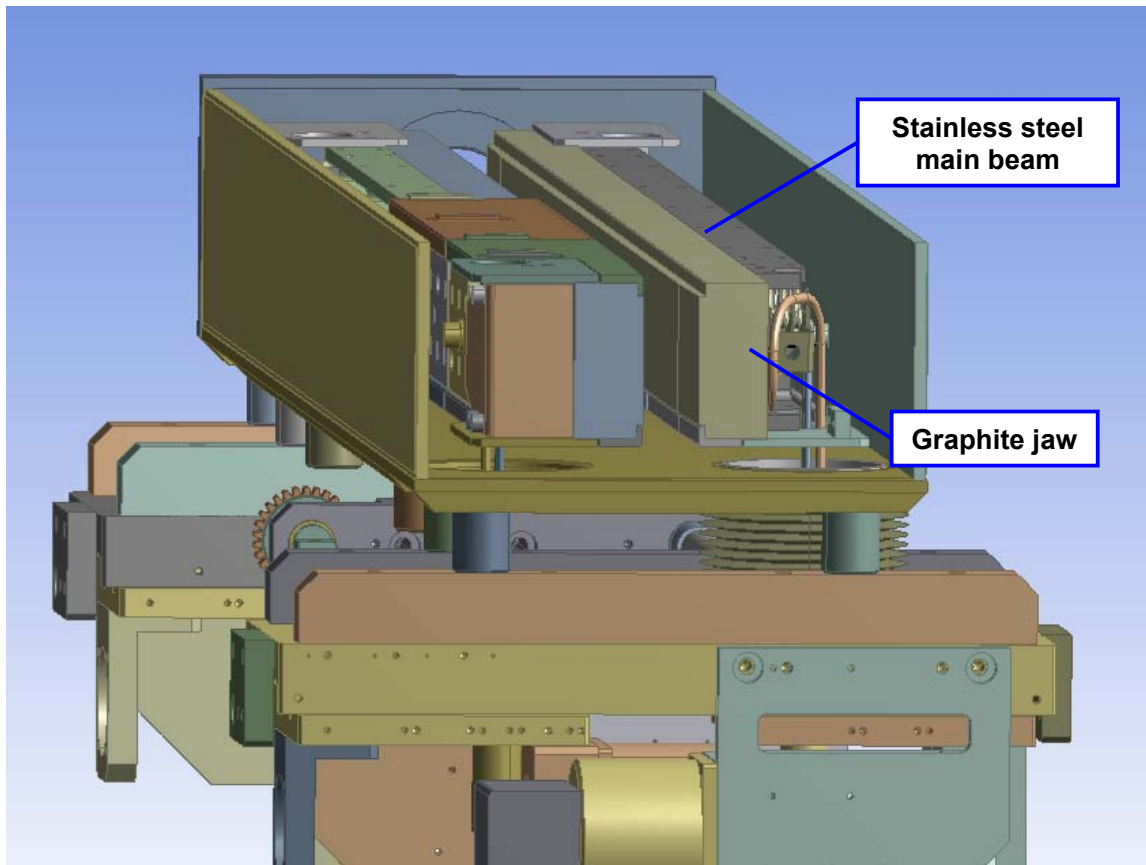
An open view of a TCDI collimator showing the jaw assembly
